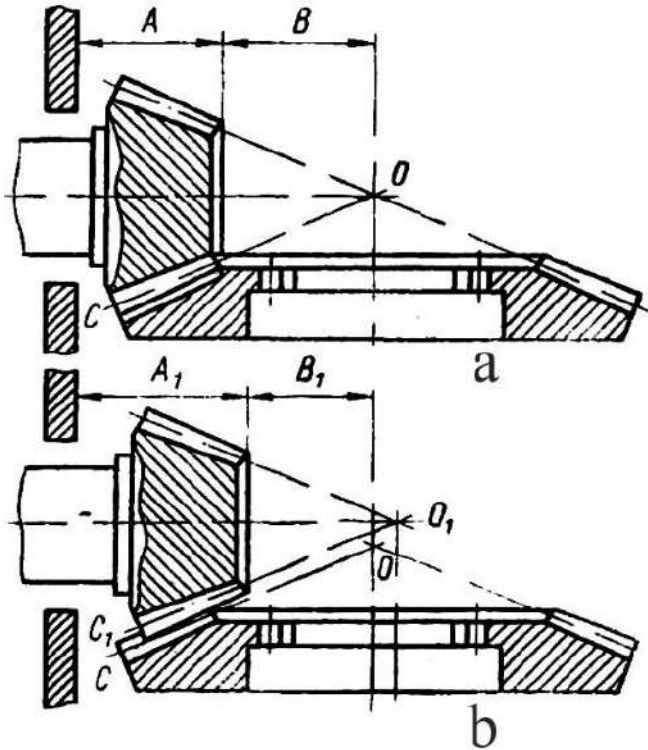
Regulating circuit of coupling of conical gears of main gear:
